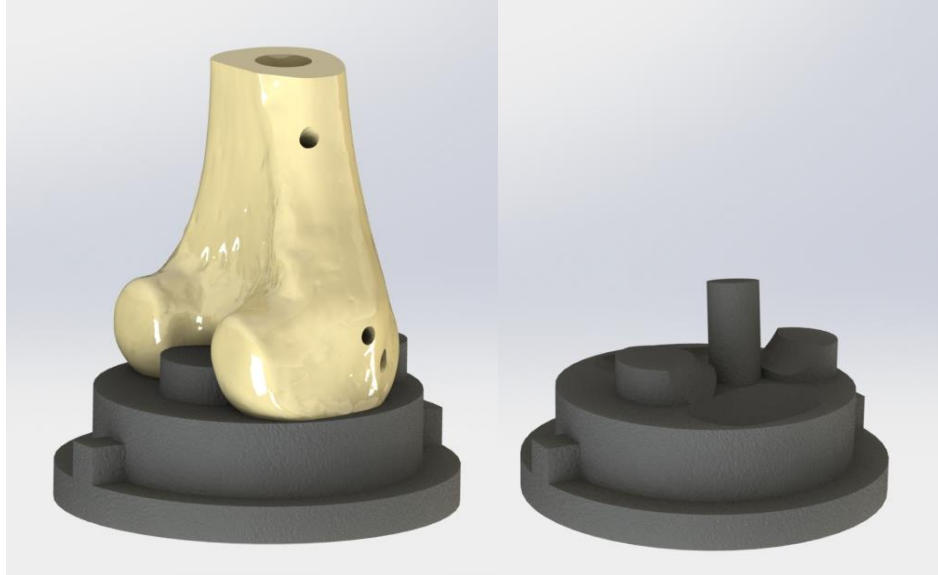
Rendering of SolidWorks (Dassault Systemes SolidWorks Corporation, Waltham, MA, USA) model of base for 3D-printed drilling fixture. The distal femur sample can be seated on the base of the fixture to ensure a reproducible drilling angle.
